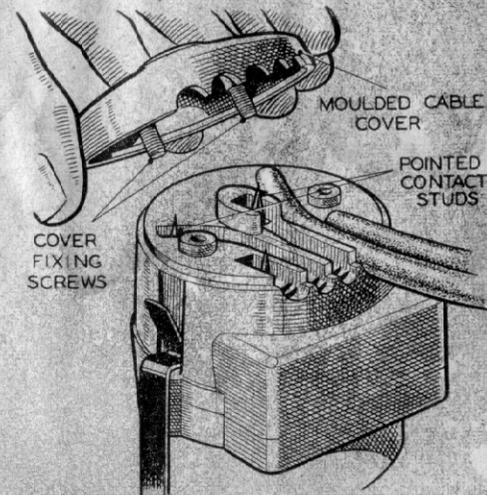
Fitting High Tension Cables to Distributor Cap.
